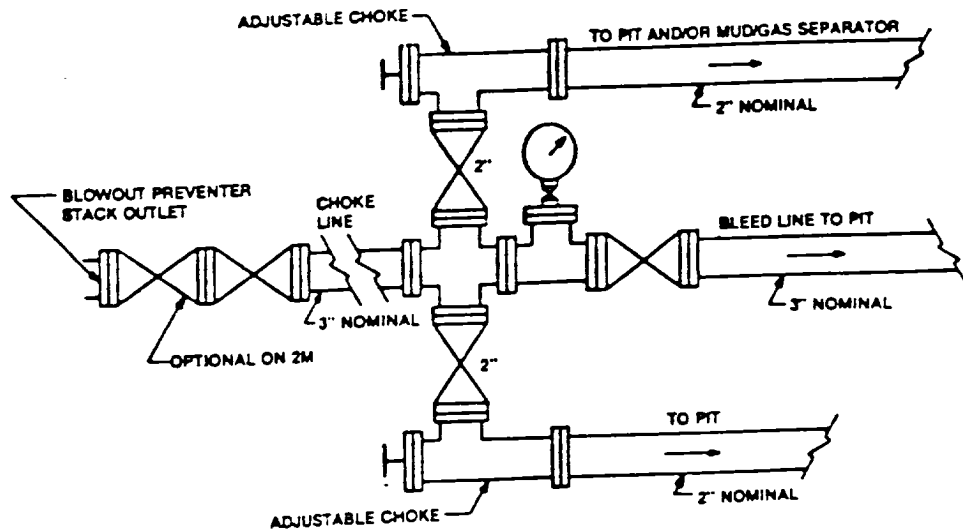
Typical choke manifold assembly for 2M and 3M rated working pressure service — surface installation.
